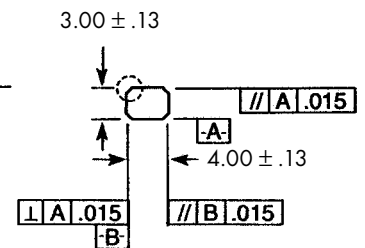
Engineering Dimensions of New Standard Specimen in millimeters
